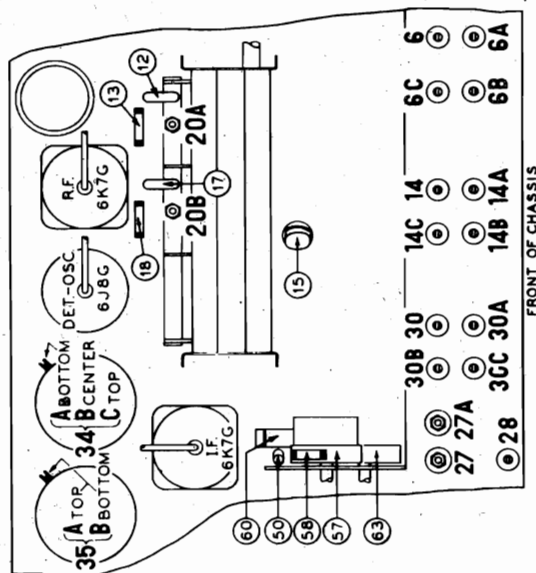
Compensator Locations: Top, Front View of Chassis.
